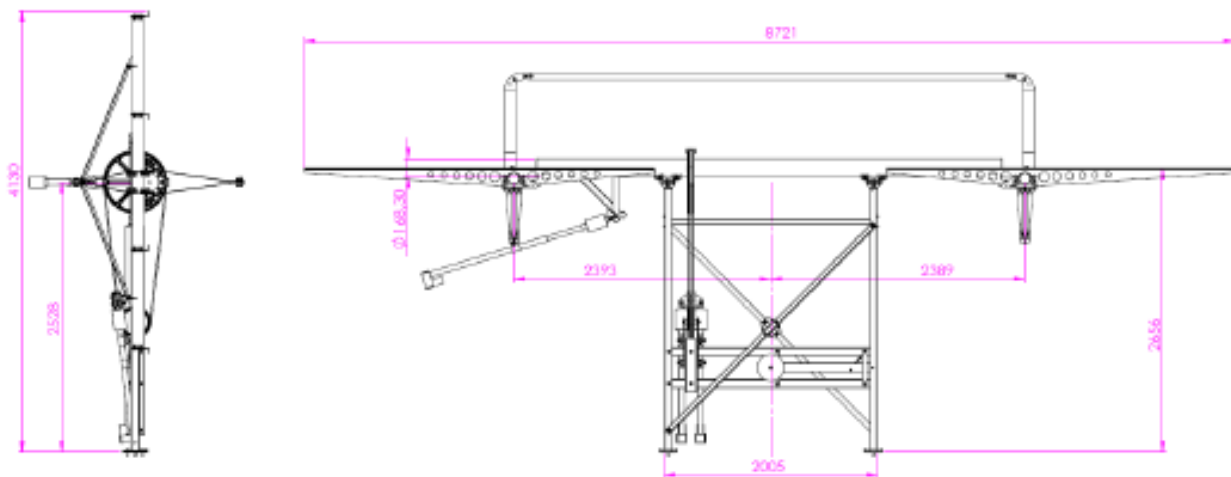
HL-25-MTP2 tracker dimensions, front view horizontal position (Right view), side view vertical position (Left view)
